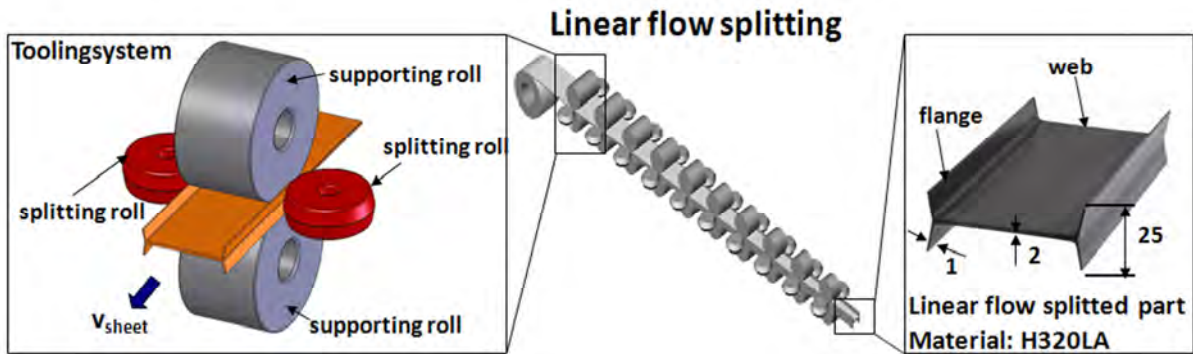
Tool arrangement (left) and manufactured prototype (right)
